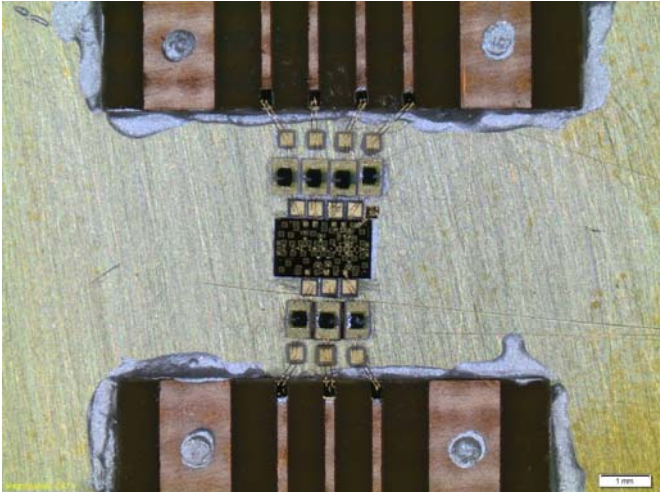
Zoom of the LSPA2 on Wafer Assembly
